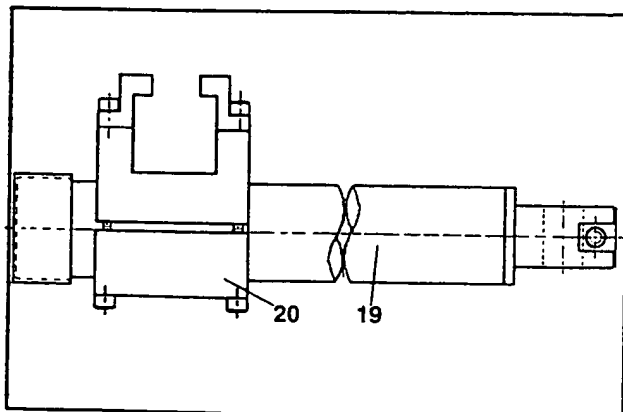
SUPPORT BRACKET & TUBE ASSEMBLY
